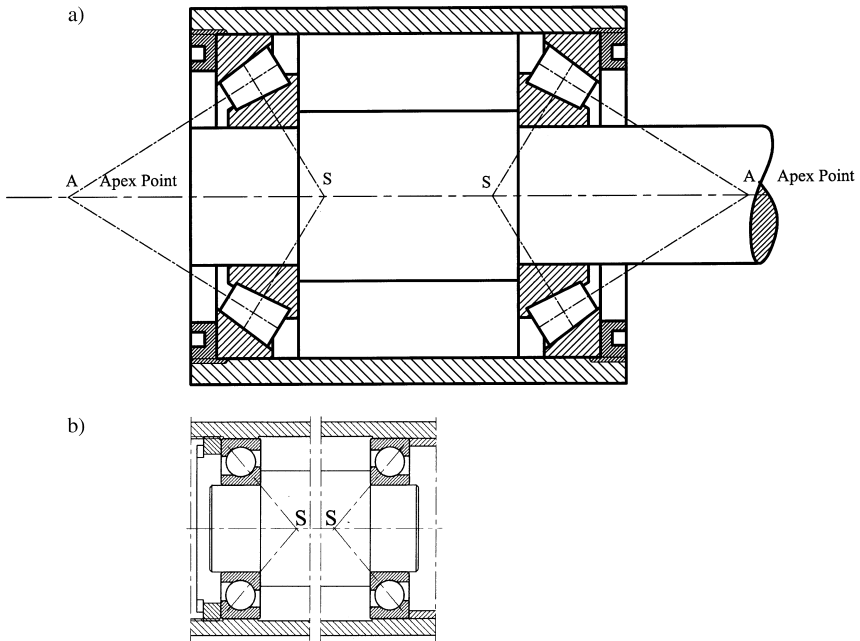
(a) Adjustable arrangement, apex points outside the two bearings. (b) Similar adjustable arrangement for angular contact bearings.
